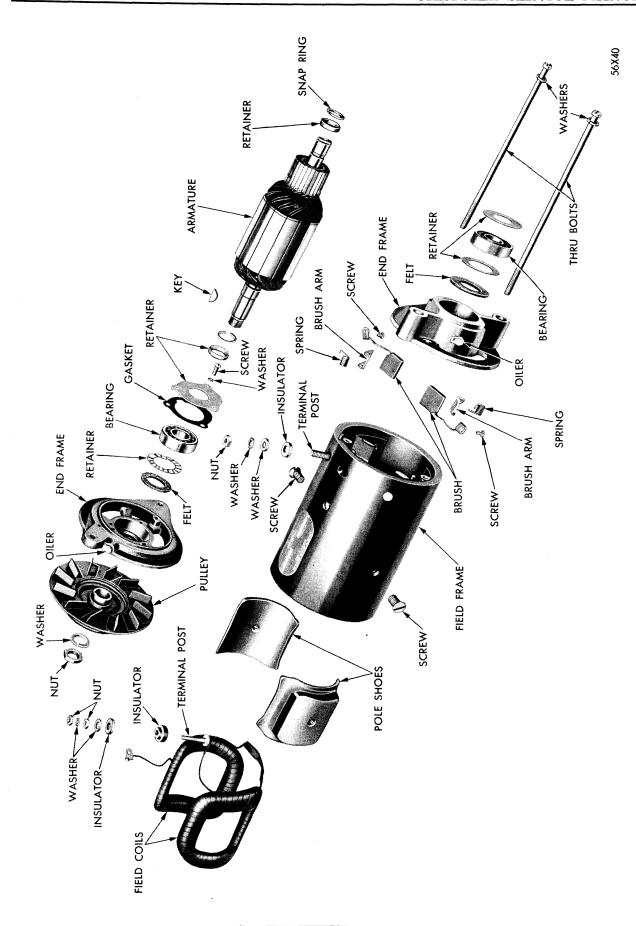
Volt Generator (Used with Air Conditioning and/or Power Steering
